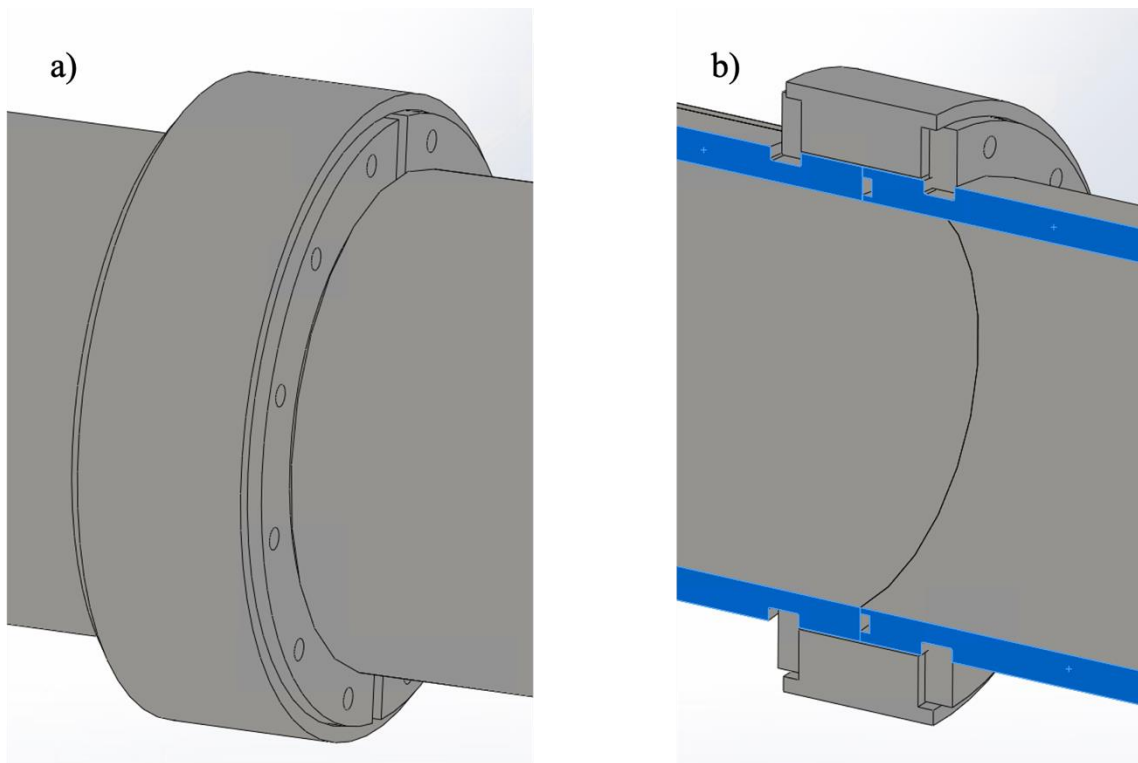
Driven-section flange coupling. a) External view, b) Section view. An o-ring is placed in a groove in one of the tube faces to provide a high-integrity seal.
